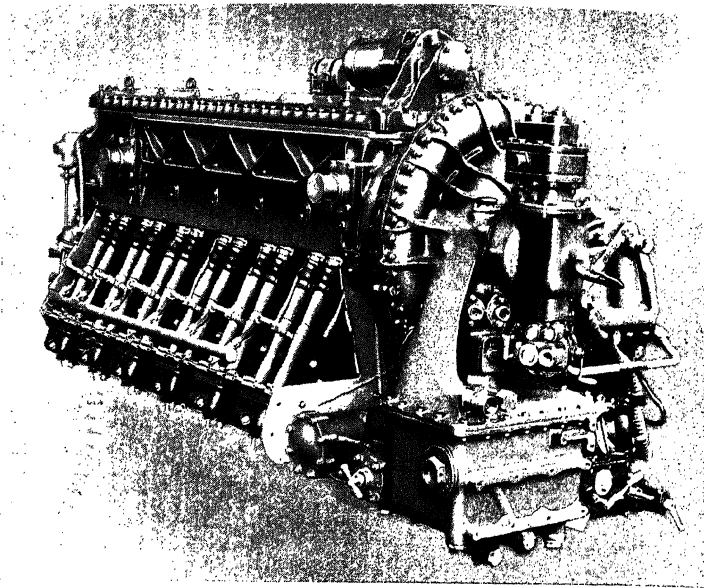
Rear end view of "Gipsy Twelve" inverted twelve-cylinder Vee engine (400 h.p.).
